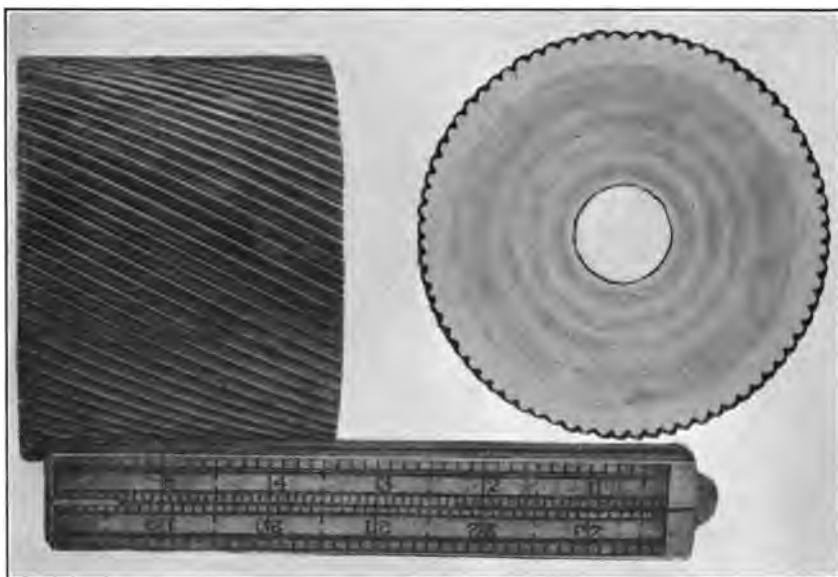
SPIRAL-CUT BURR, SIX TO THE INCH.
